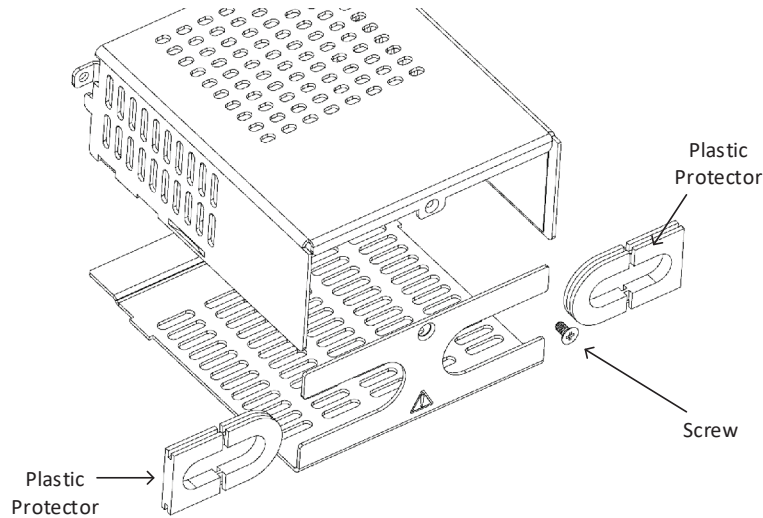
Disassembly of Output Protection (1kW Up to 5kW Full Width)
